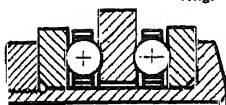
Rigid double-thrust bearing with sleeve and nut.
